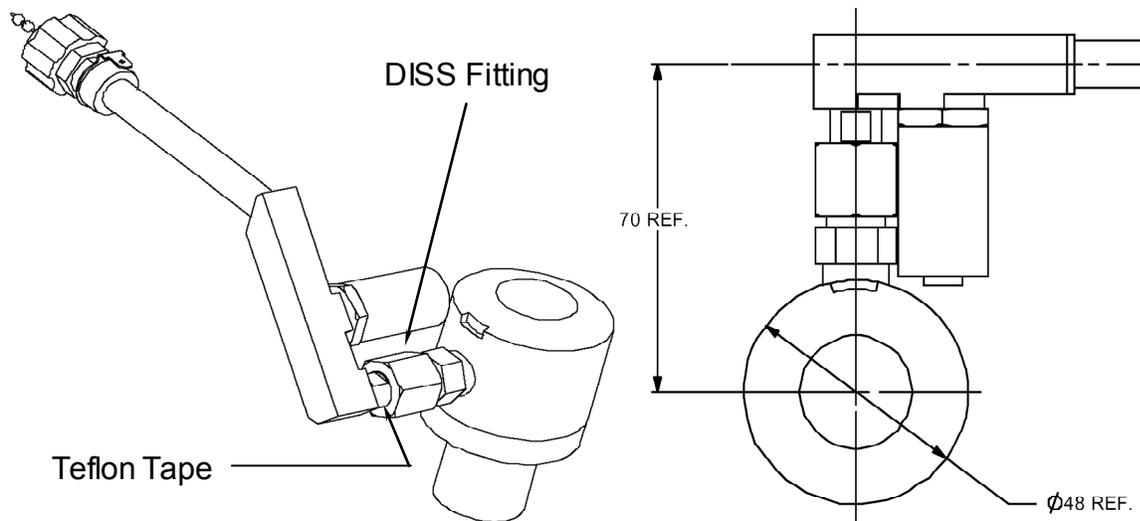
O₂ Inlet Pipe and Demand Valve
